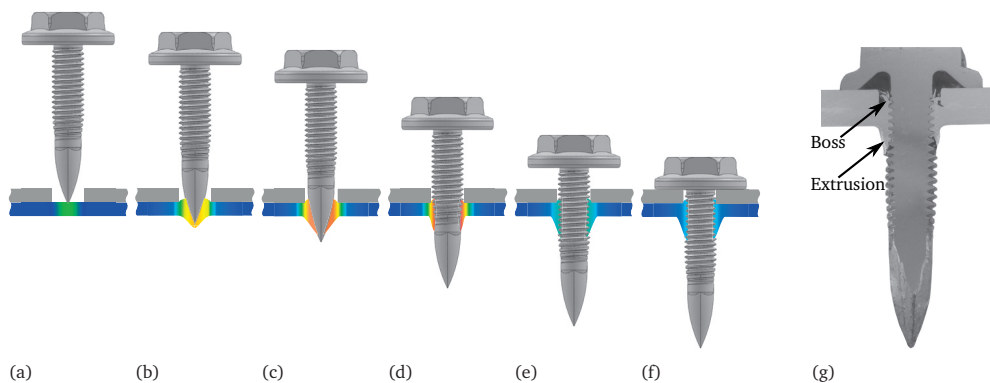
The FDS process. (a) Heating. (b) Penetration. (c) Extrusion forming. (d) Thread forming. (e) Screw driving. (f) Tightening. A picture of an FDS connection is shown in (g), with the boss and extrusion indicated.
